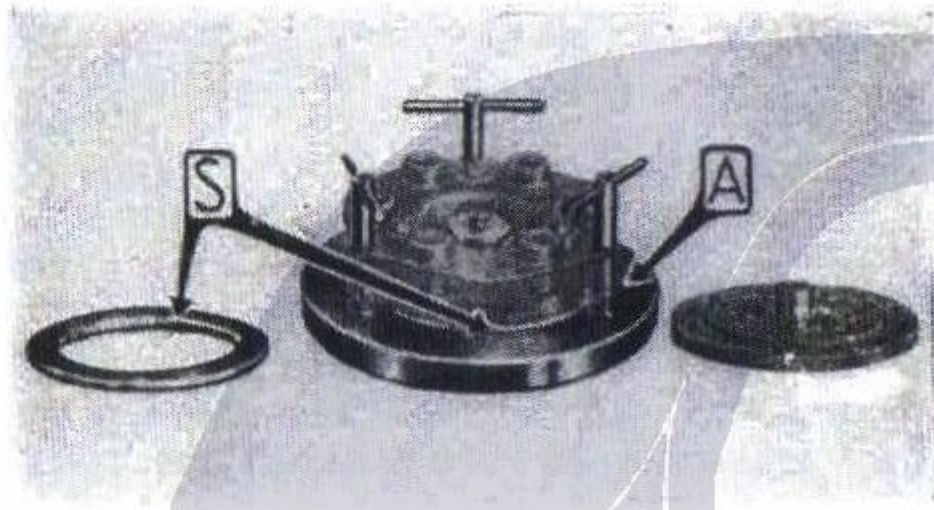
Tool A. 10112 for dismantling assembling and adjusting the clutch
